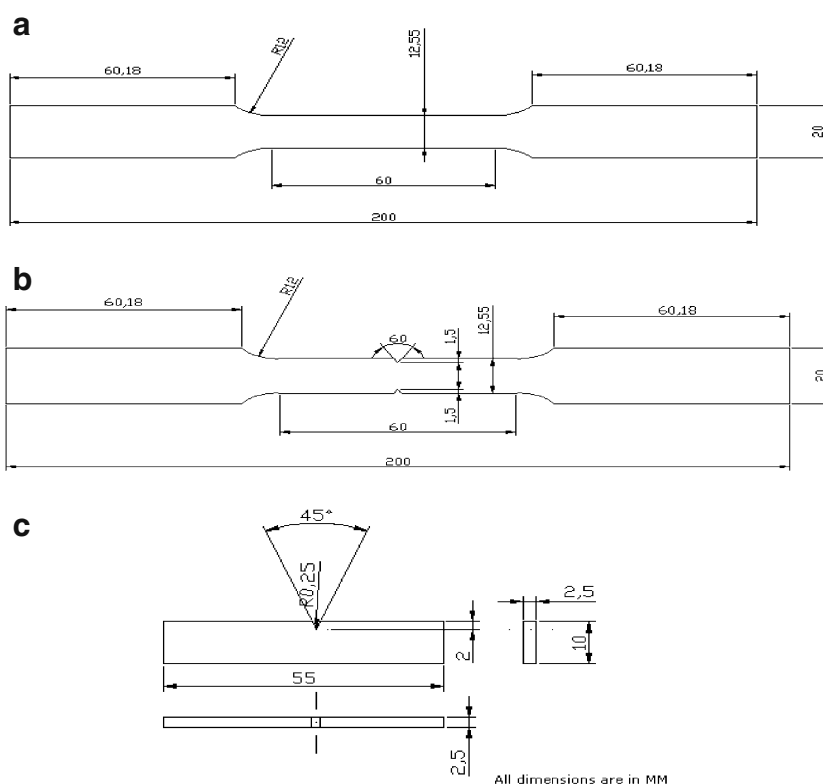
Configuration of a plain tensile test specimen, b notch tensile test specimen, and c Charpy V-notch impact test specimen
